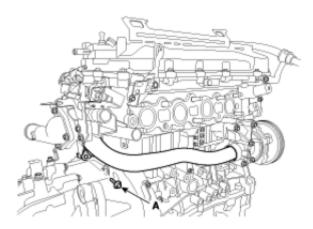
Identifying Water Temperature Control Assembly And Oil Cooler Hoses Courtesy of HYUNDAI MOTOR CO.
